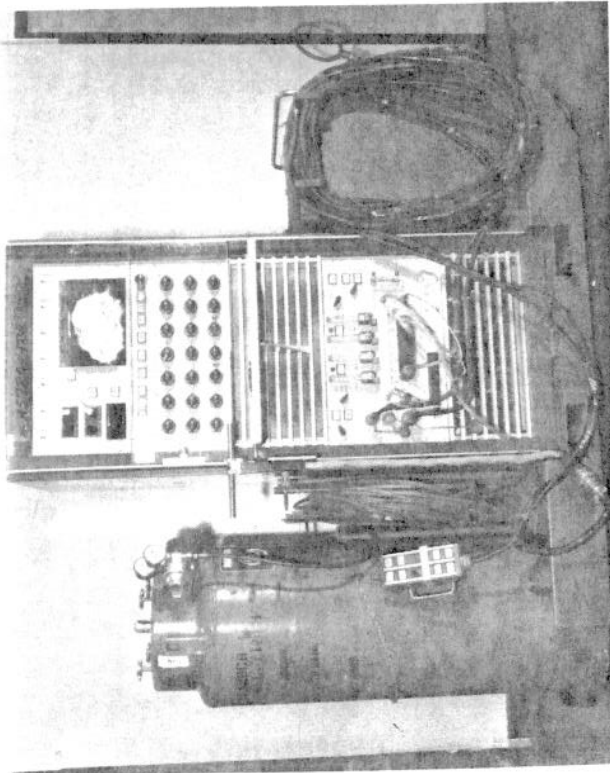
TYPICAL COMMERCIAL INPLACE GTA TUBE WELDING POWER SUPPLY/PROGRAMMER AND WELD HEAD
